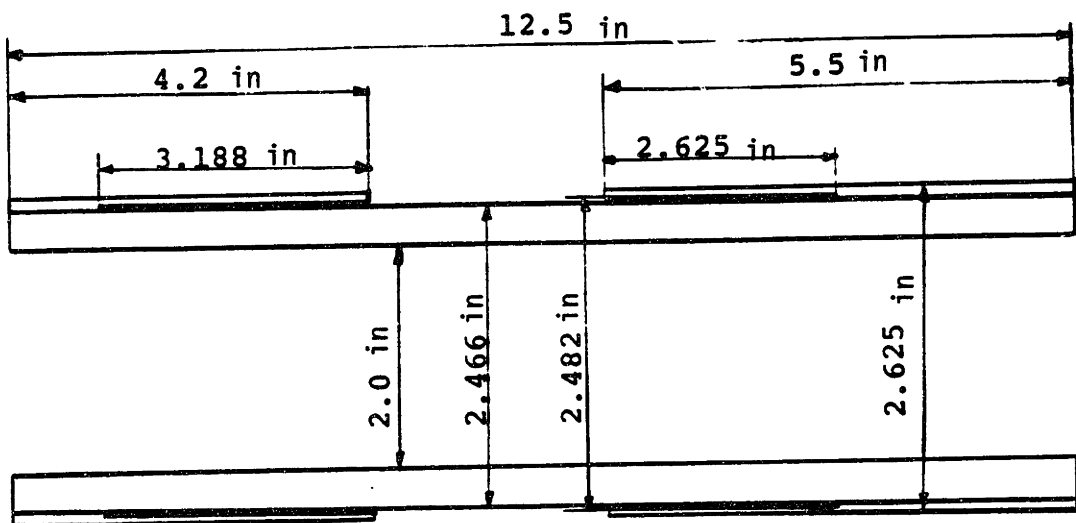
Steel Shaft with the Epoxy Bonded Steel Sleeves Used in the Vibration Test
